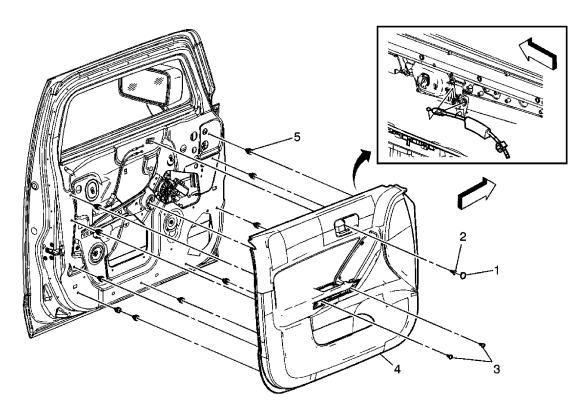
Removing/Installing Front Side Door Trim Panel Courtesy of GENERAL MOTORS CORP.
